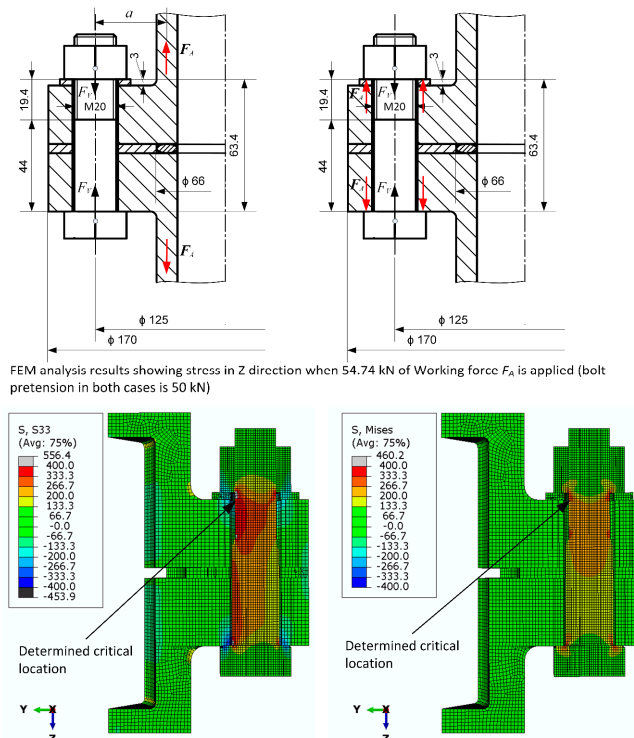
Examples discussed to demonstrate the influence of resilience of bolt and clamping parts on bolt fatigue; Adapted from ref. [27].
